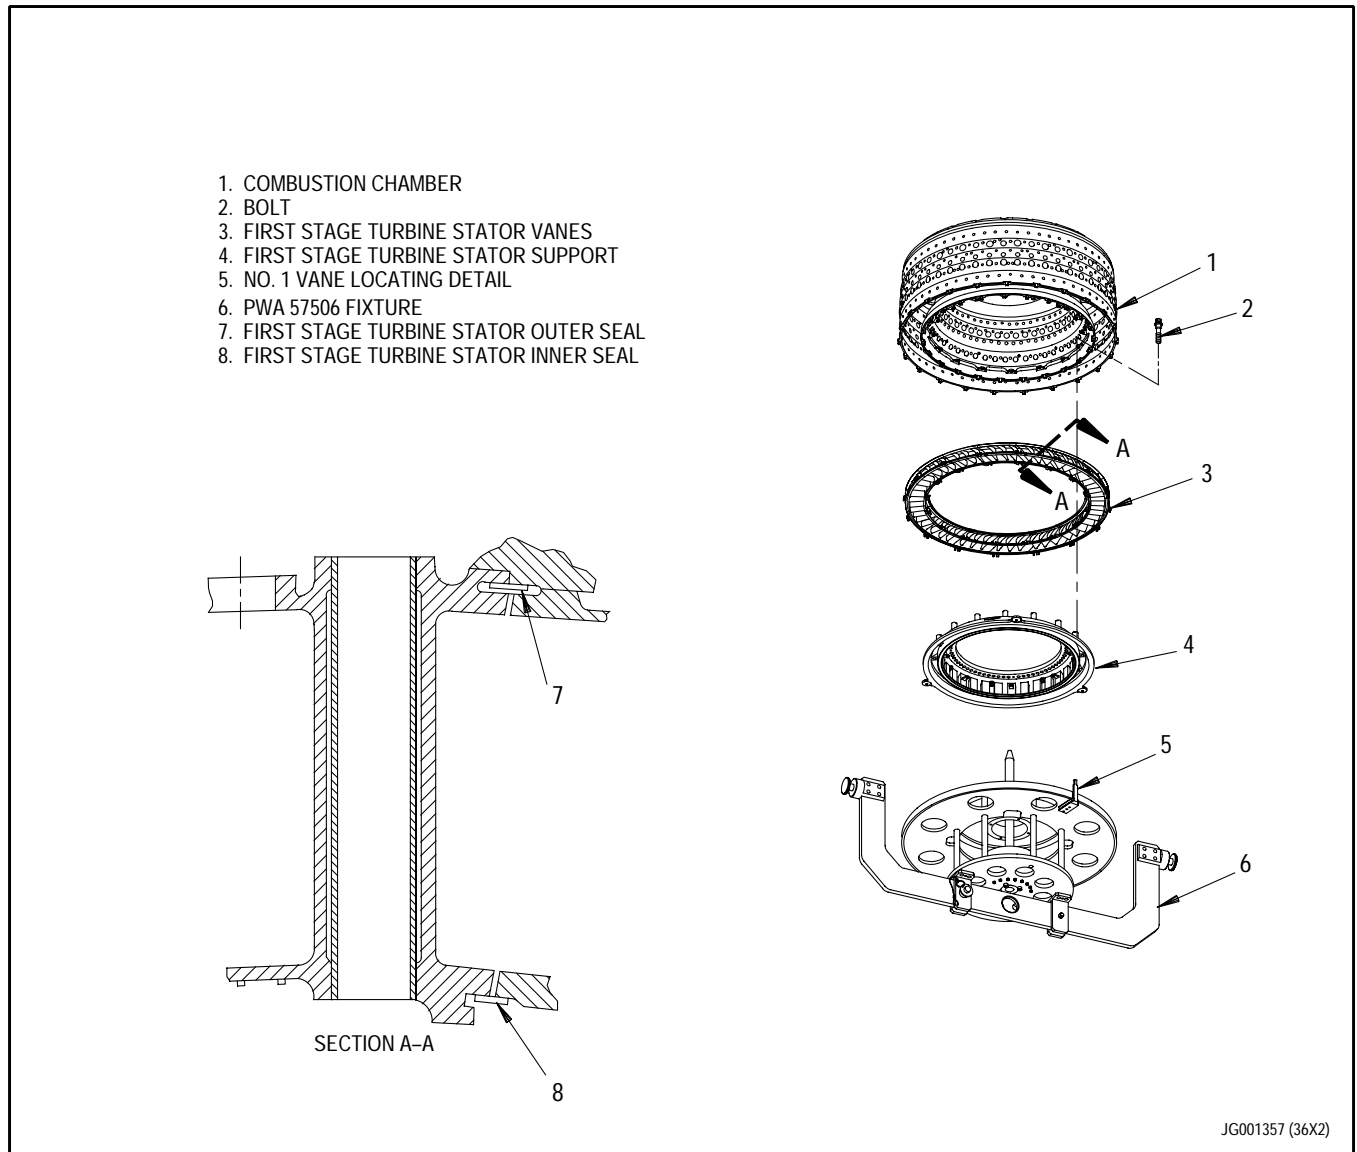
Combustion Chamber First Stage Turbine Stator Vanes and Support - Assembly
